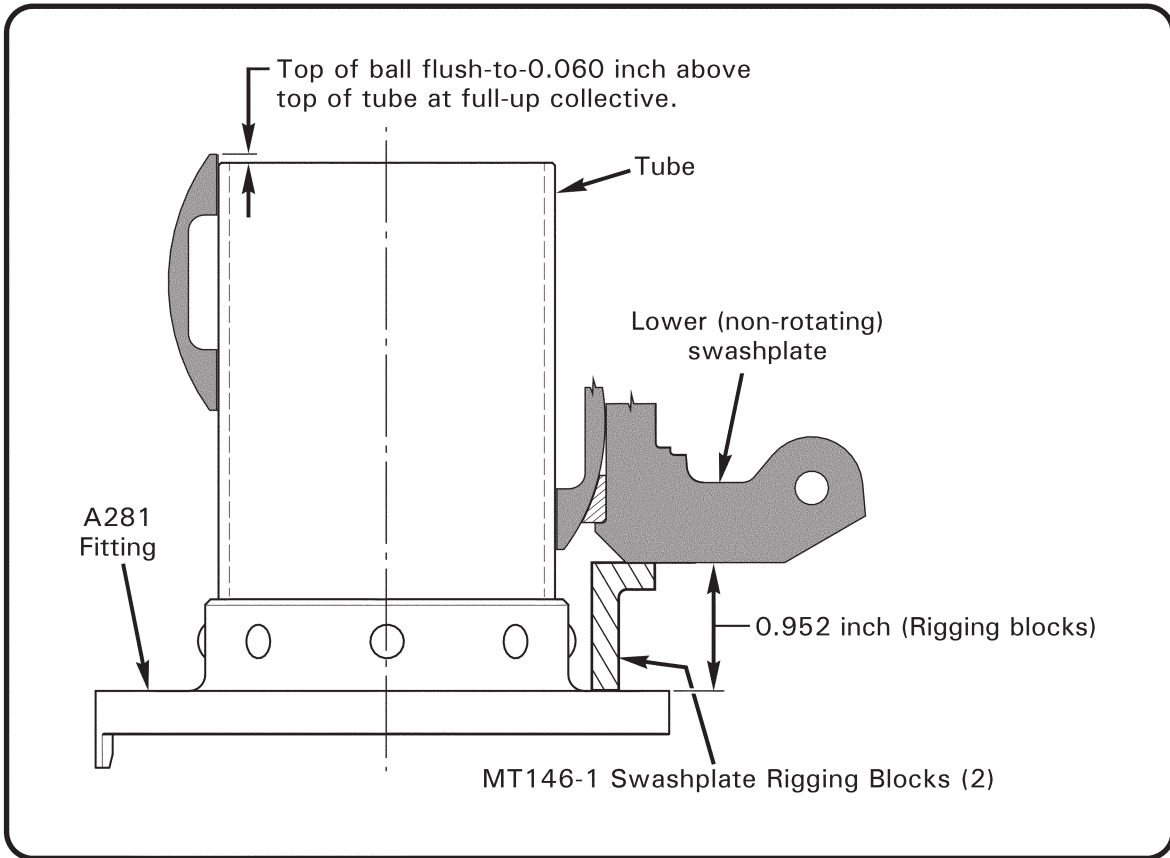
LOWER SWASHPLATE CLEARANCE
